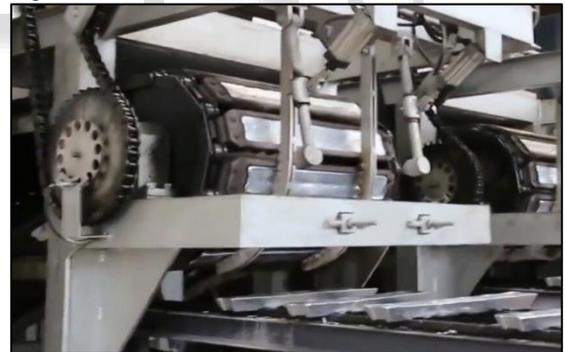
Proposed Design for Unloading the Casting from Conveyor
